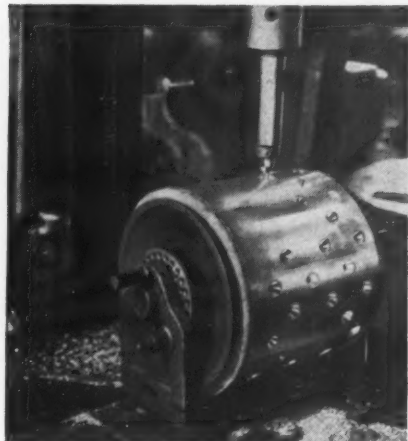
Drilling and countersinking a floating rod bushing. Six different arrangements of holes can be drilled with this fixture.
